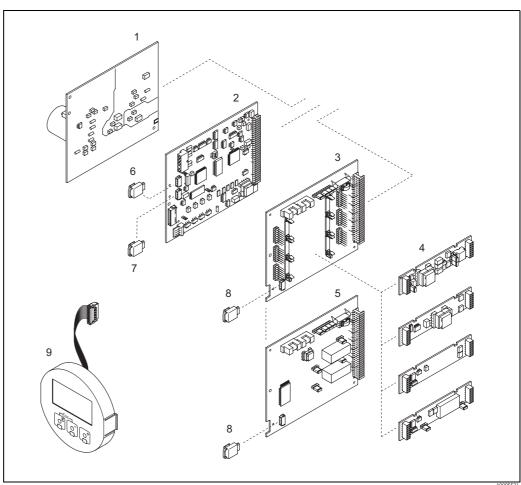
Spare parts for Promag transmitter (field and wall-mount housing)
